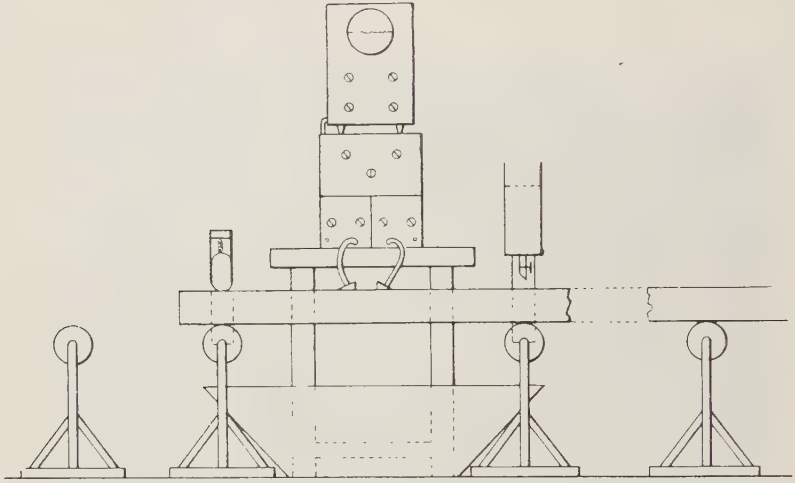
Assembly for routine inspection of rectangular extruded sections.
